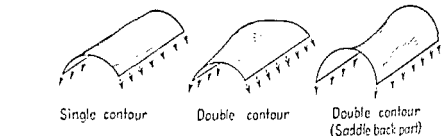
Typical shapes to which sheets may be readily stretch-formed.¹⁴
